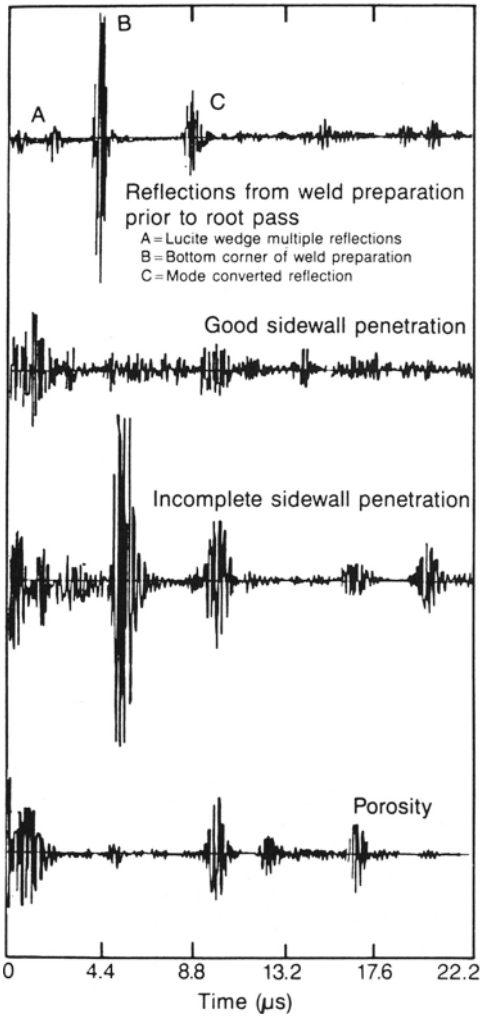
A scans of weld preparation prior to and during the root pass of good and flawed weld acquired with a single element transducer.
